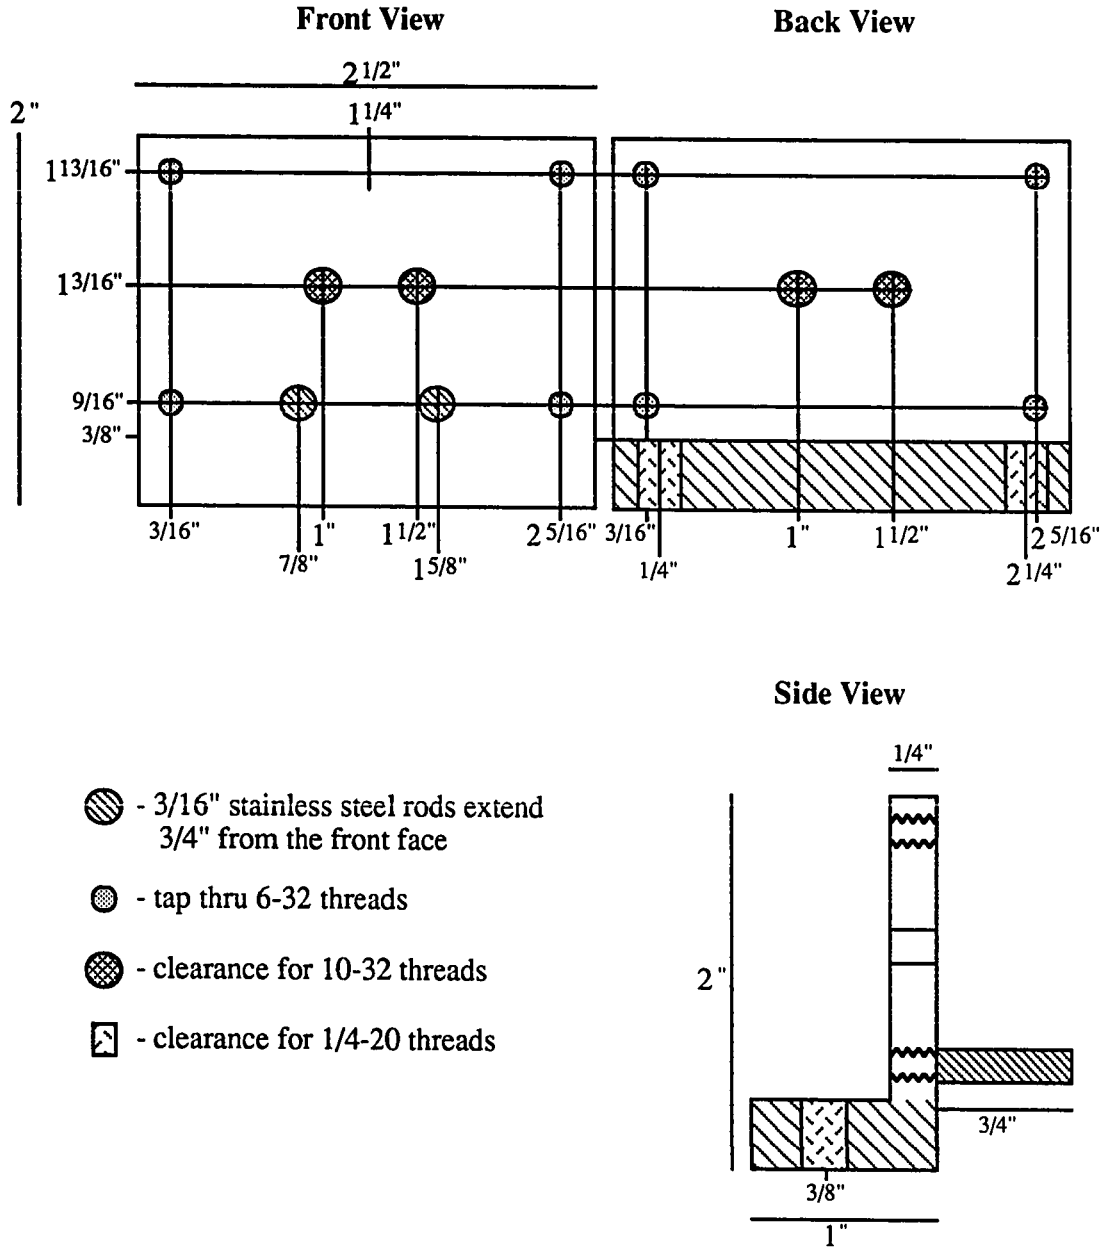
Stainless steel L-bracket: front, back, and side views.
